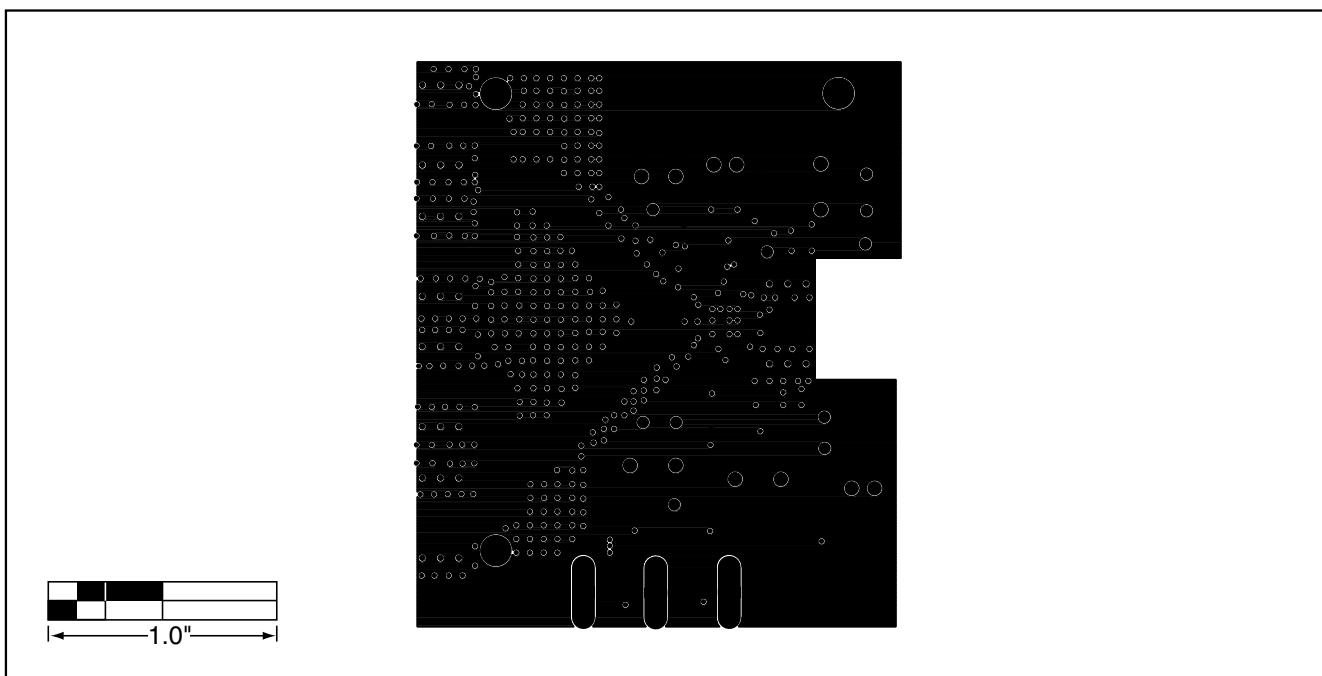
MAX3935 EV Kit PC Board Layout—Power Plane
